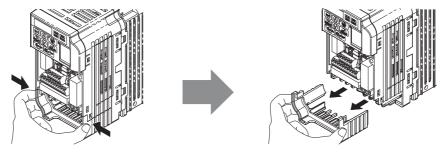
Remove the Bottom Cover on an IP20/Open-Chassis Drive (Models CIMR-V□BA0001B to BA0003B and 2A0001B to 2A0006B)
